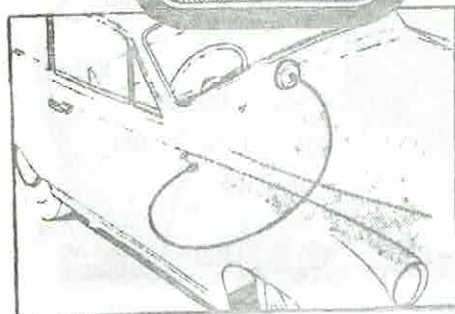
SMOOTH RUN. The run of flexible drive must be smooth, the minimum bend radius being 6 in. No bend within 1 in. of connections is permissible.
